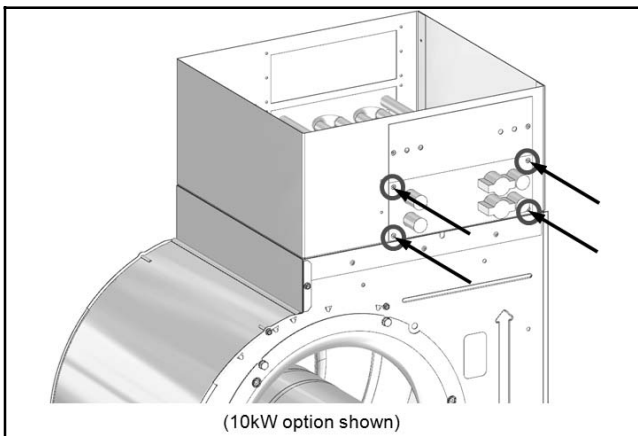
Secure Insert with Supplied Sheet Metal Screws
